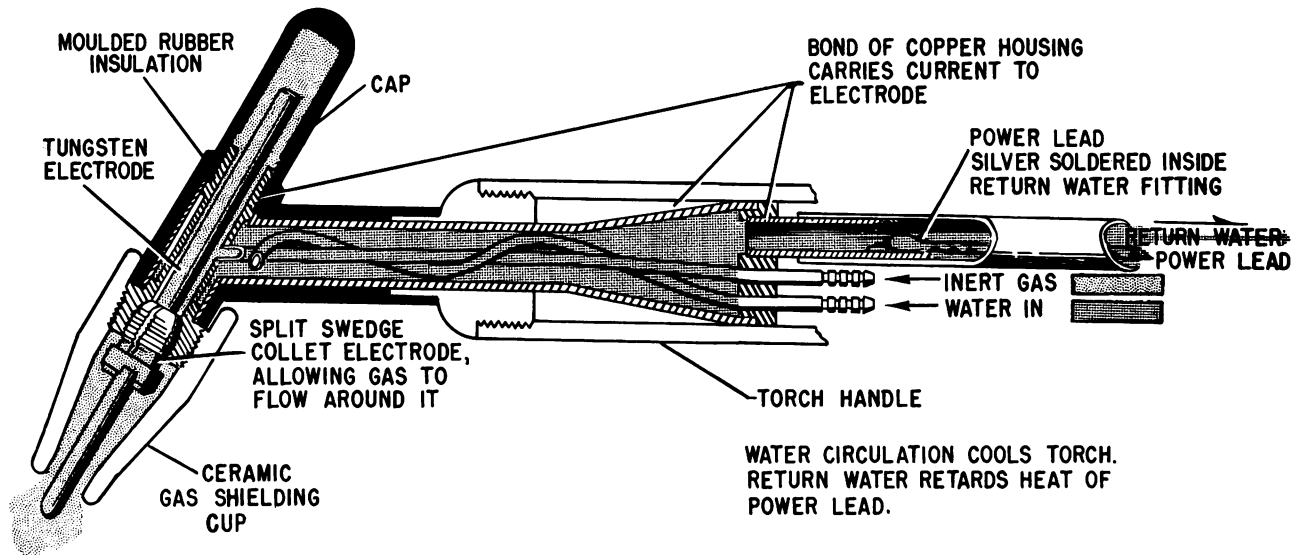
Typical water-cooled TIG welding torch.
